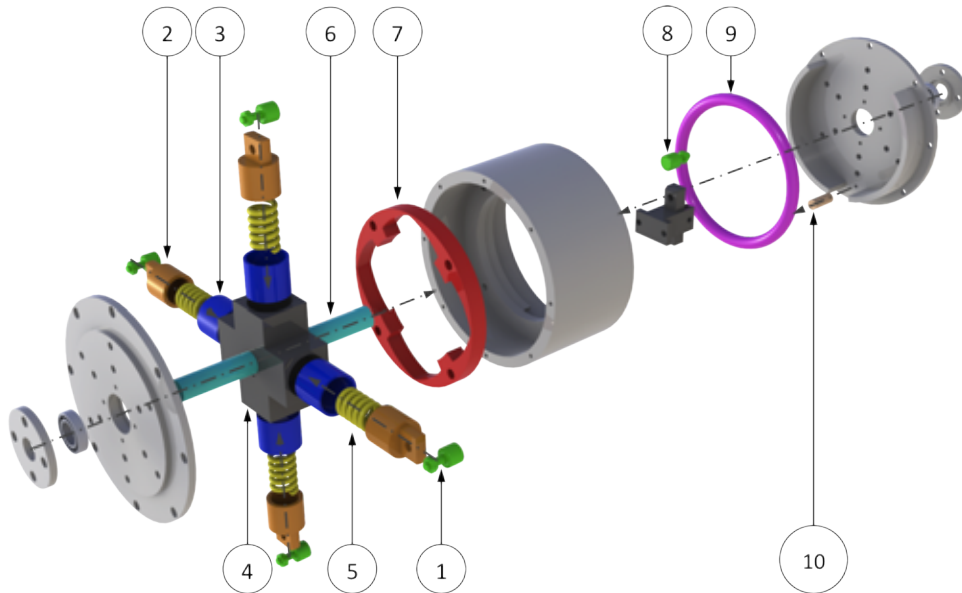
Exploded view of the pVEJ. 1: cam follower rollers, 2: roller-spring connectors, 3: bushings, 4: central hub, 5: linear compression springs, 6: joint shaft, 7: cam profiles, 8: fluid mover, 9: silicone tube, 10: pressure drop regulator.
